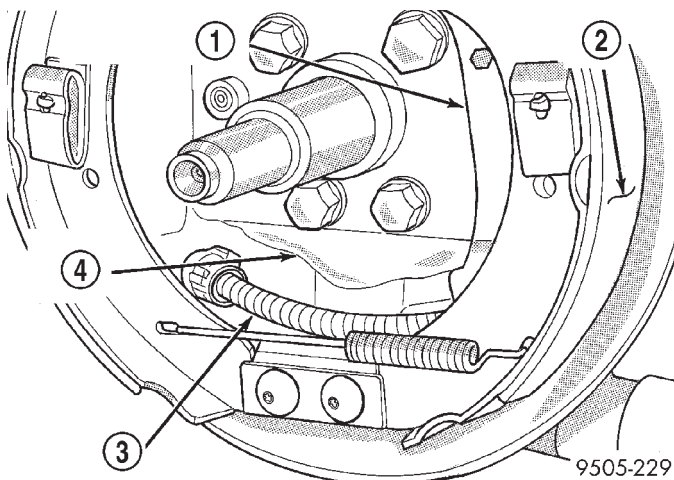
Park Brake Cable Attachment To Actuating Lever
